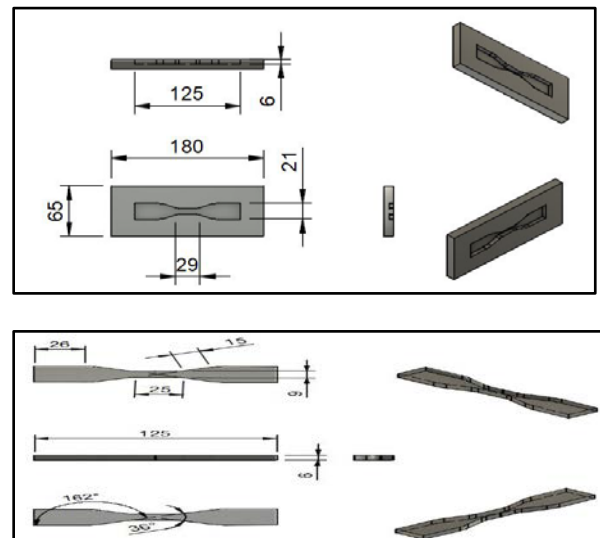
Dimensions of the die as per ASTM standards (All dimensions are in mm)
